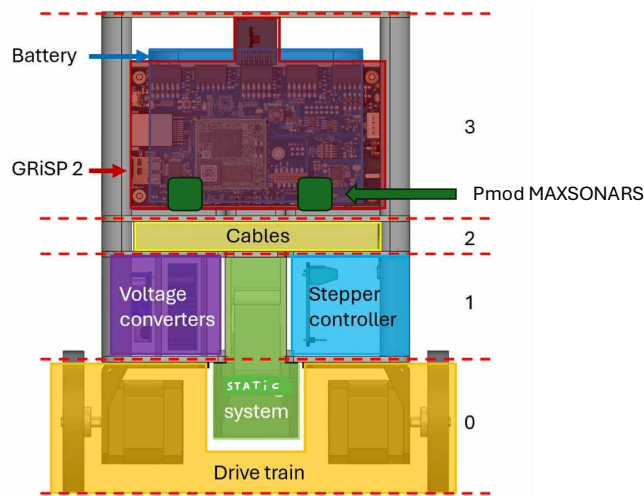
Front view of the base of the two-wheeled self-balancing butler. Modified from [22].
